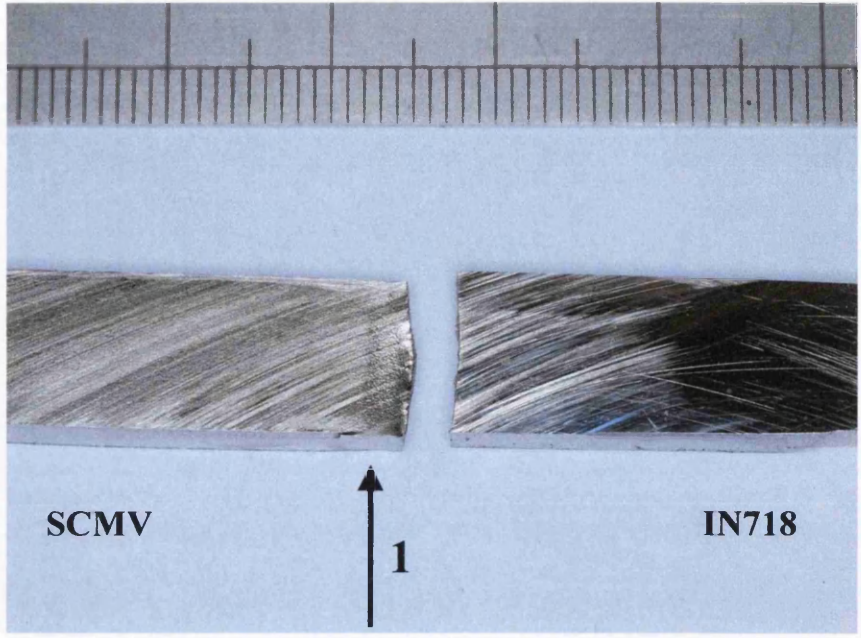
A section through the failed Microbraz brazed fusion weld mechanical test piece.
